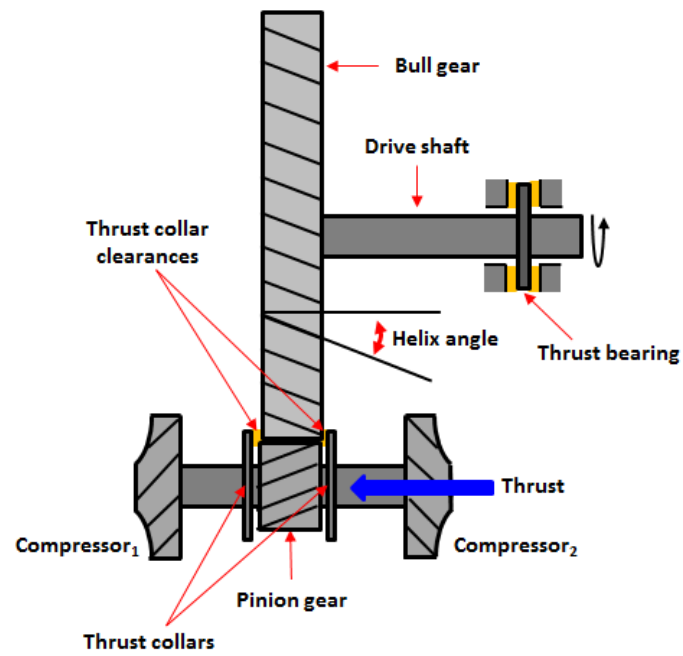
Cut view of a two stage integrally geared compressor [1,12].
